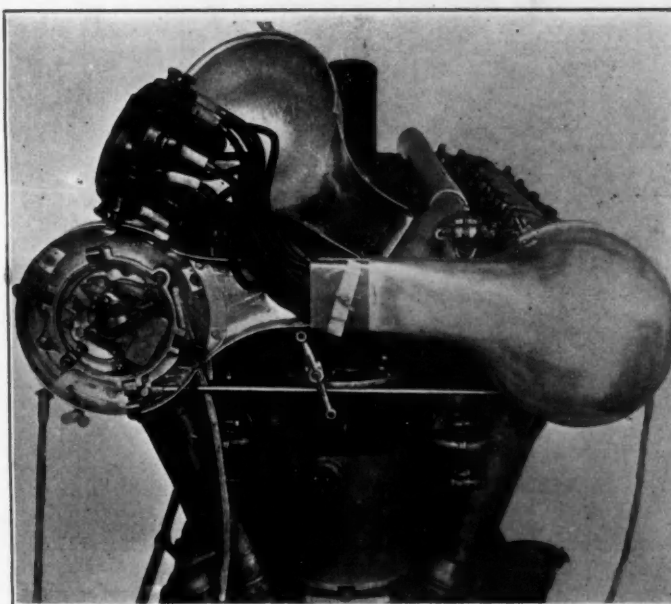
RADIO-SHIELDING MANIFOLD ON LIBERTY-12 ENGINE
